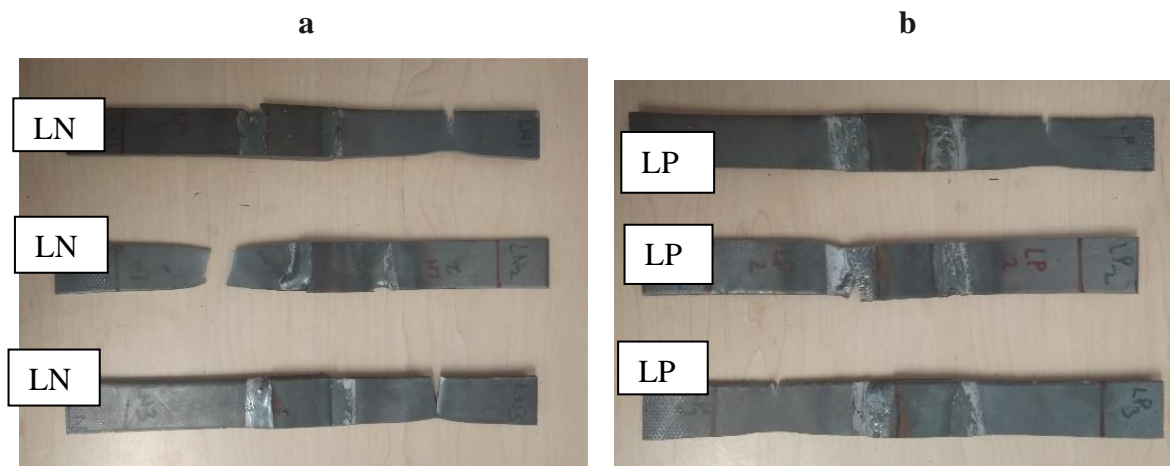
Fracture of lap welds a) unreinforced samples b) reinforced samples
